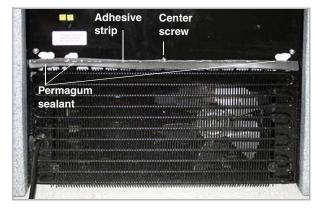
Rear view of refrigeration module (Adhesive strip, Permagum sealant)
